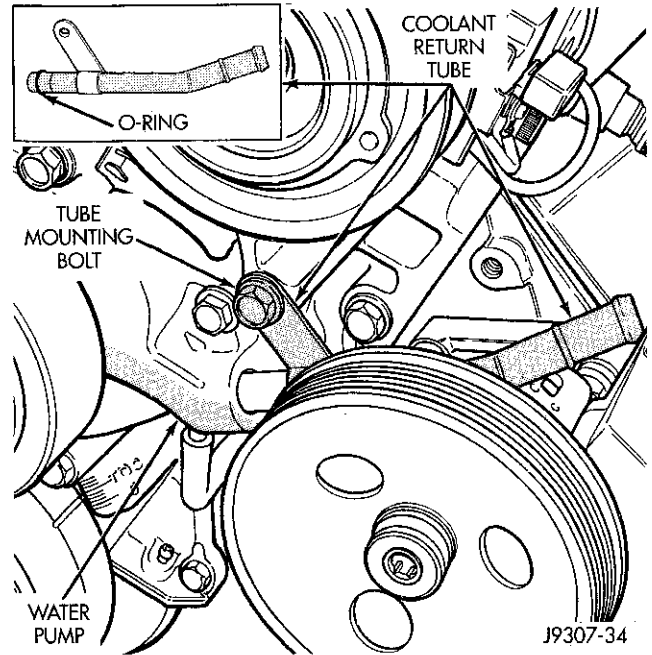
Coolant Return Tube—3.9L V-6 or 5.2/5.9L V-8 LDC-Gas Engines
